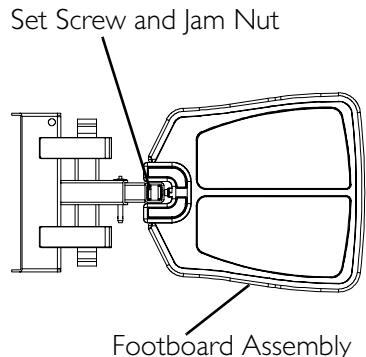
Removing/Installing the Footboard Assembly
